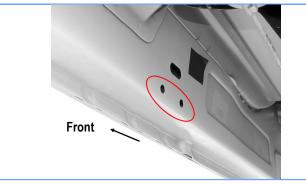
Attach Support Bracket to the Back of Pinch Weld (Some Models May Require to Drill Holes on Pinch Weld)
